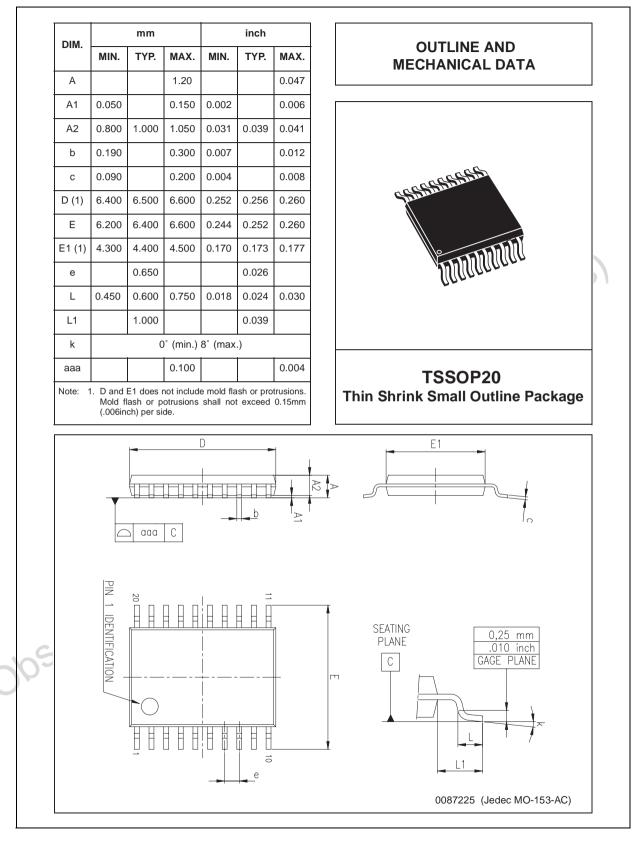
TSSOP20 Mechanical Data & Package Dimensions
